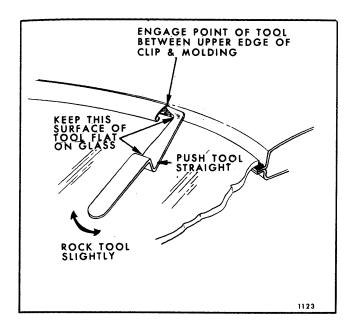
Usage of Reveal Molding Disengagement Tool
